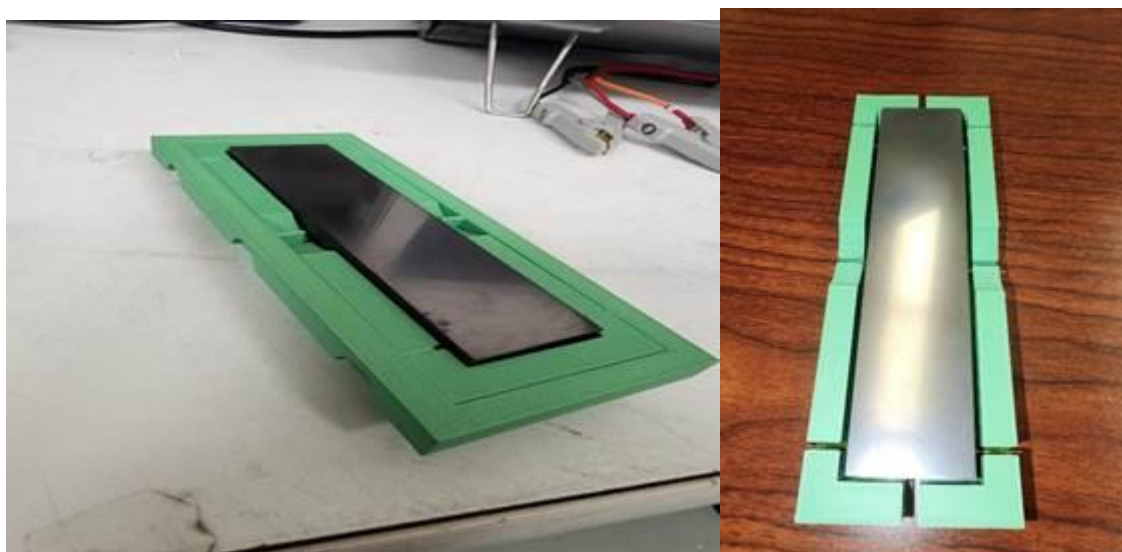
Full fixture installed (a) with retaining ring and (b) without retaining ring.
